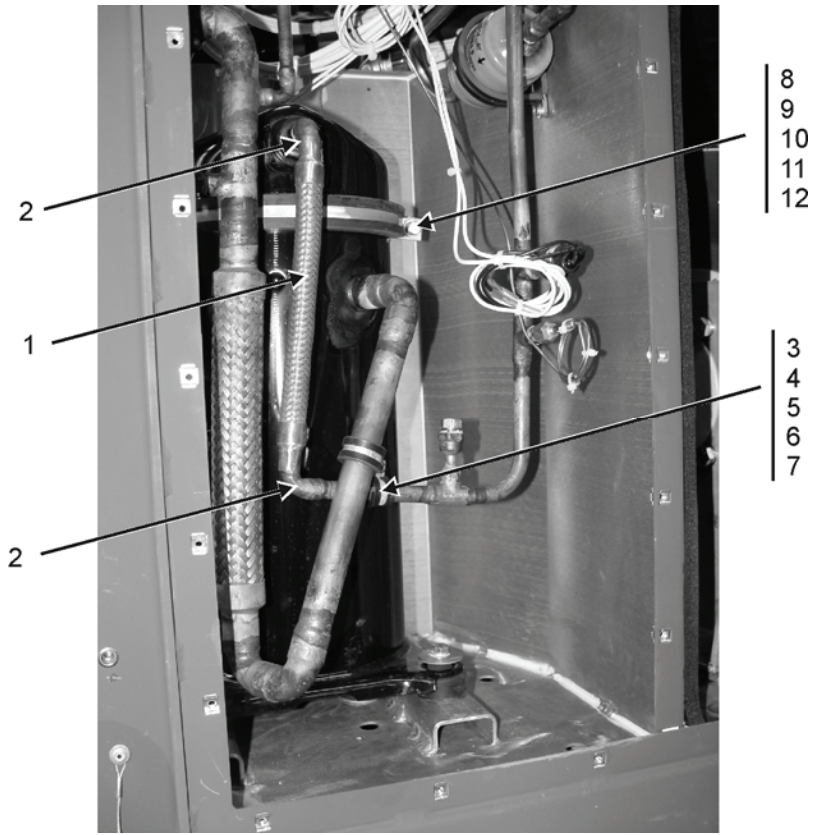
Metal Hose Assembly (Vibration Damper) (Discharge) with Insulation Removed
